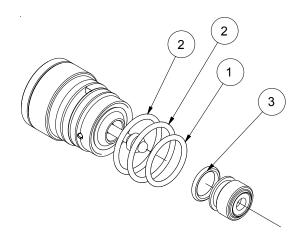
78949-00 Valve & 77367-00 Seat Replacement Parts
